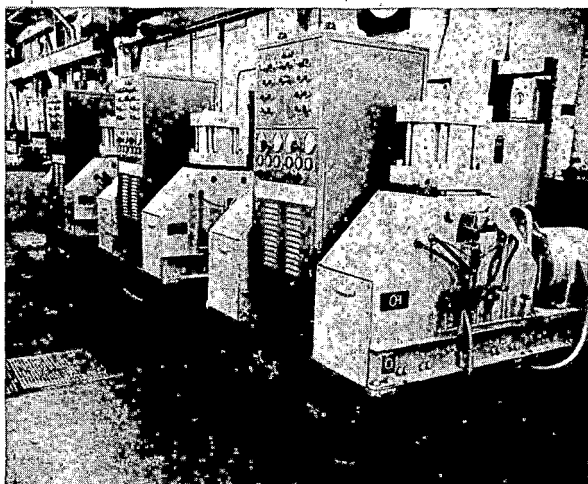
TIMKEN BEARING FATIGUE TEST MACHINES
